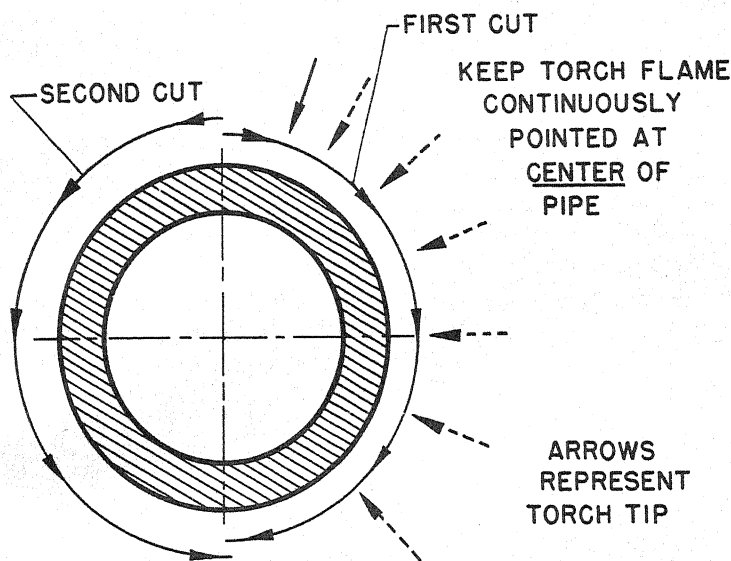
Cutting pipe with the oxyacetylene cutting torch.
